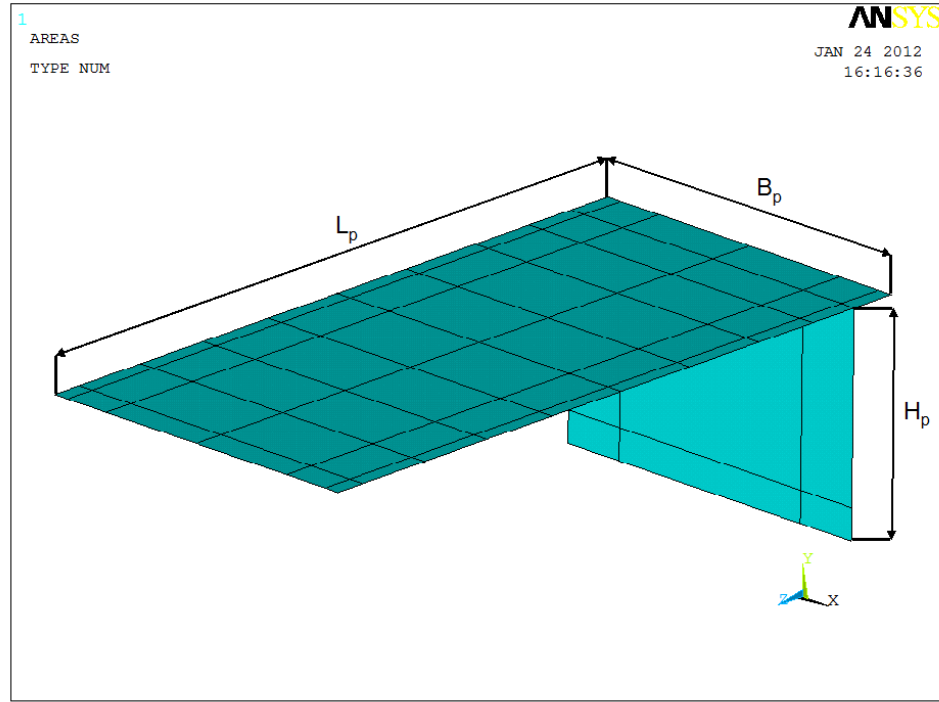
Main dimensions of main horizontal supporting plate and vertical back plates
